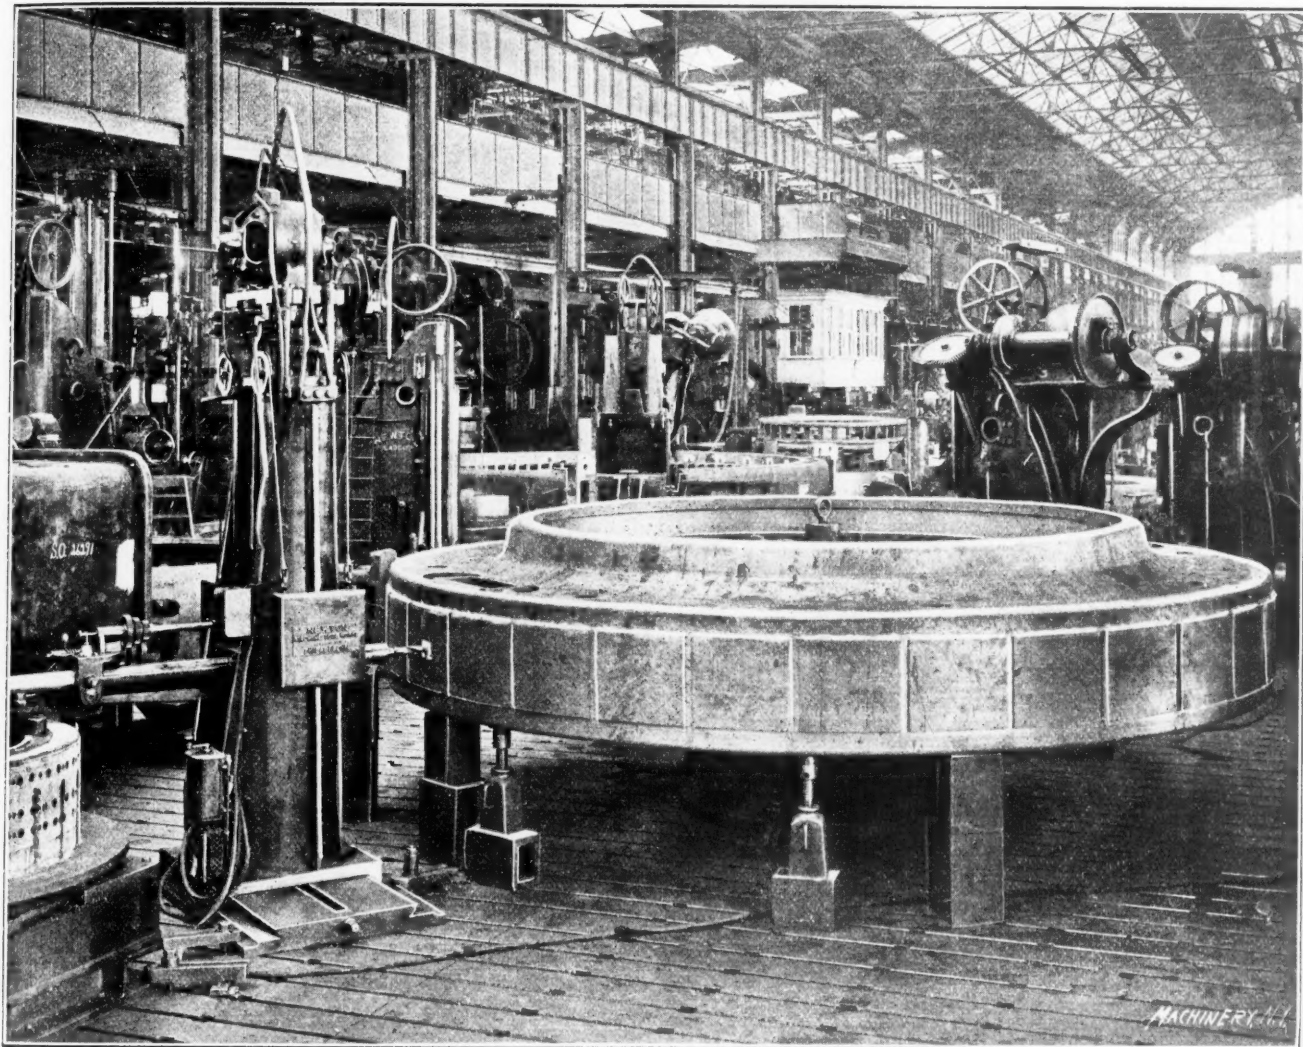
Portable Drilling and Milling Machine Operating on a Heavy Rotor, in Conjunction with a Portable Central Pivot for Indexing.
